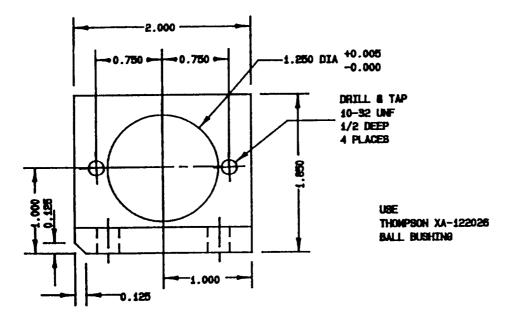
Iosipescu Shear Test Fixture Alignment Tool Assembly and Clamp Assembly.
